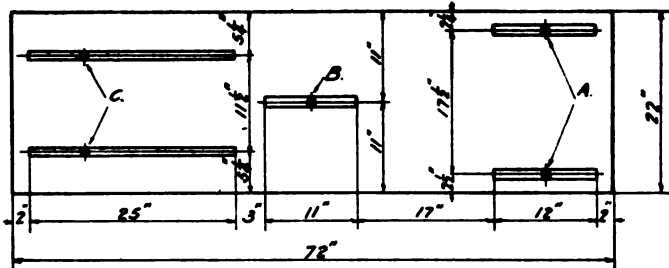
Drawing of Bradford table. A, Shoulder support,  $\frac{5}{8}$ -inch steel bars. B, Perinea. bar, 1-inch steel bar. C, Ankle grips,  $\frac{5}{8}$ -inch steel bars.
